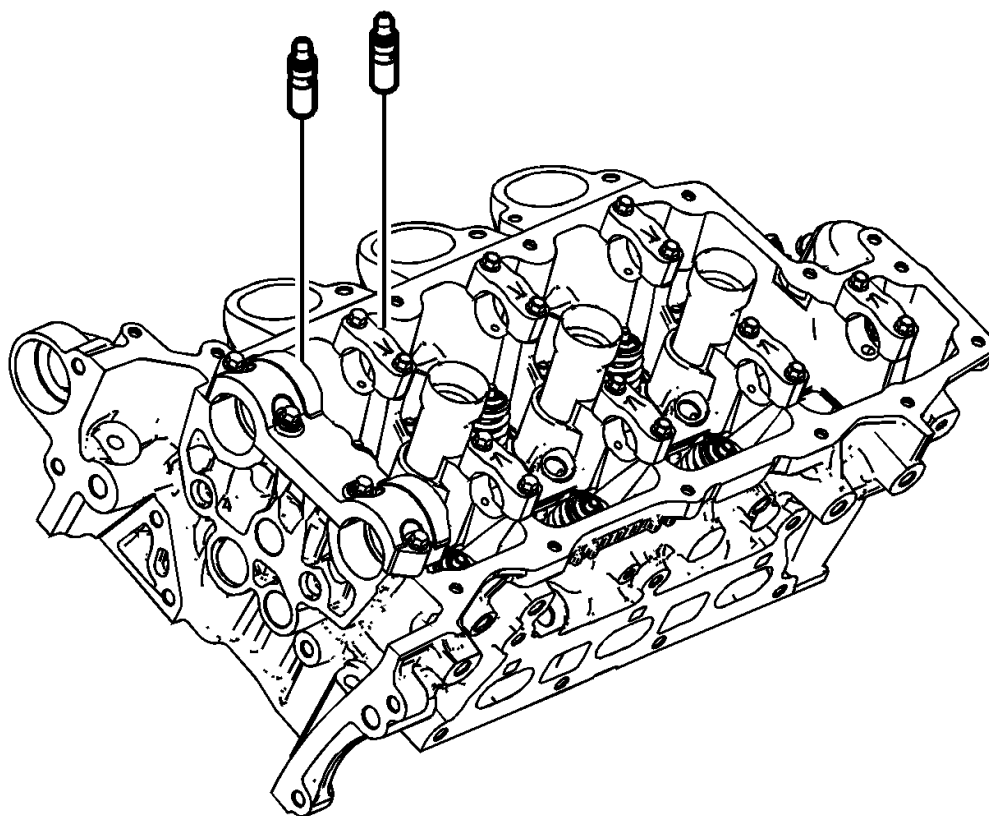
Valve Lifter Removal - Left Side (LLT)
